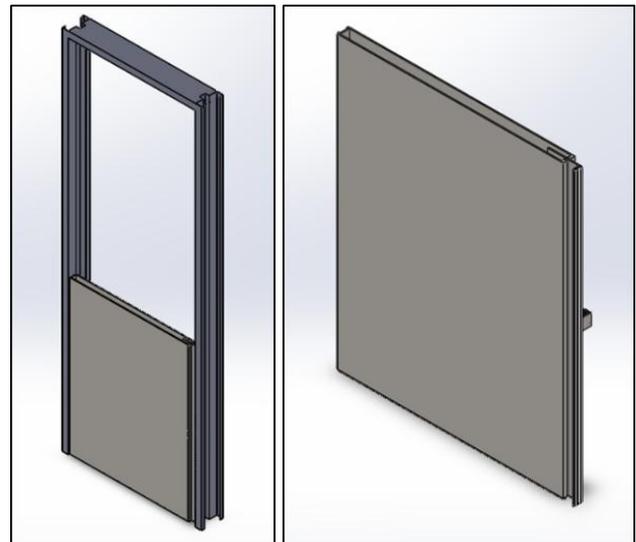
Isometric view of the design+ door frame (left) Design without doorframe (right)
